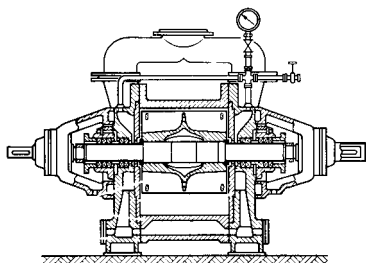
Liquid ring compressor, single-stage, with double impeller (acc. to Siemens)
